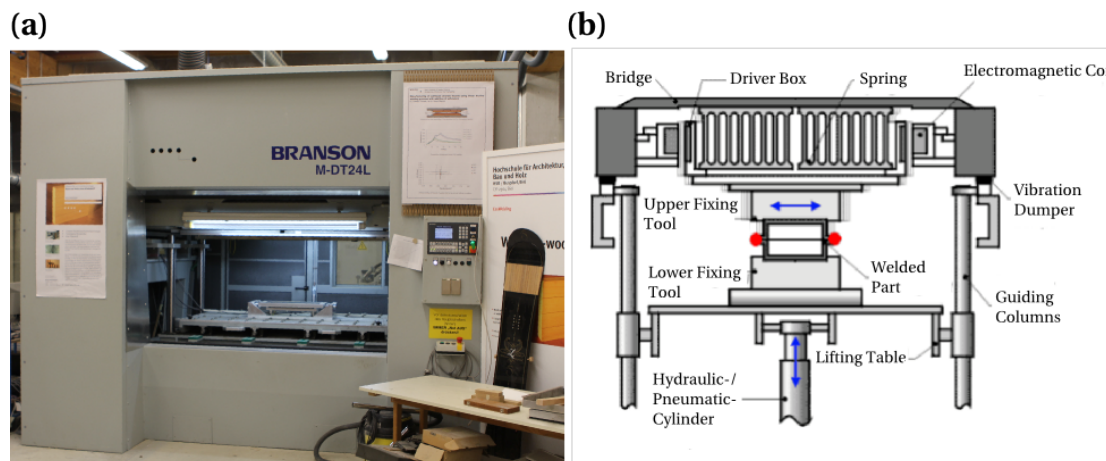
(a) Photograph and (b) syochematic representation of the welding machine (www.bransoneurope.eu).
